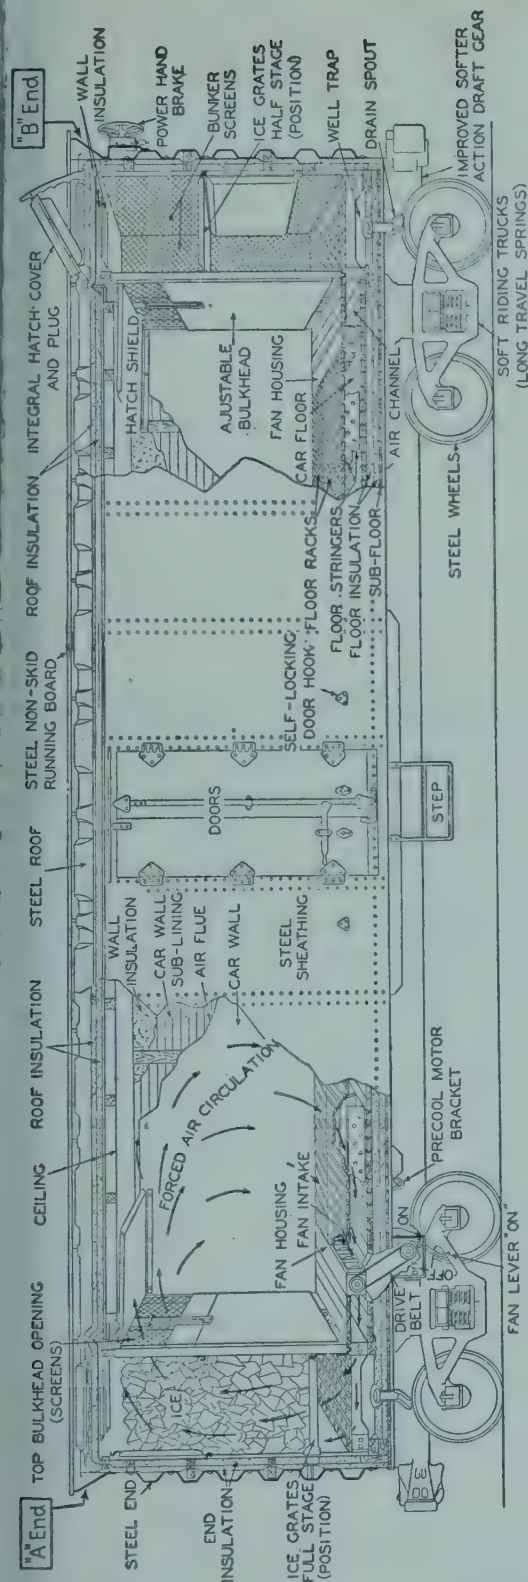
Modern Refrigerator Car, Showing Improved Components.
